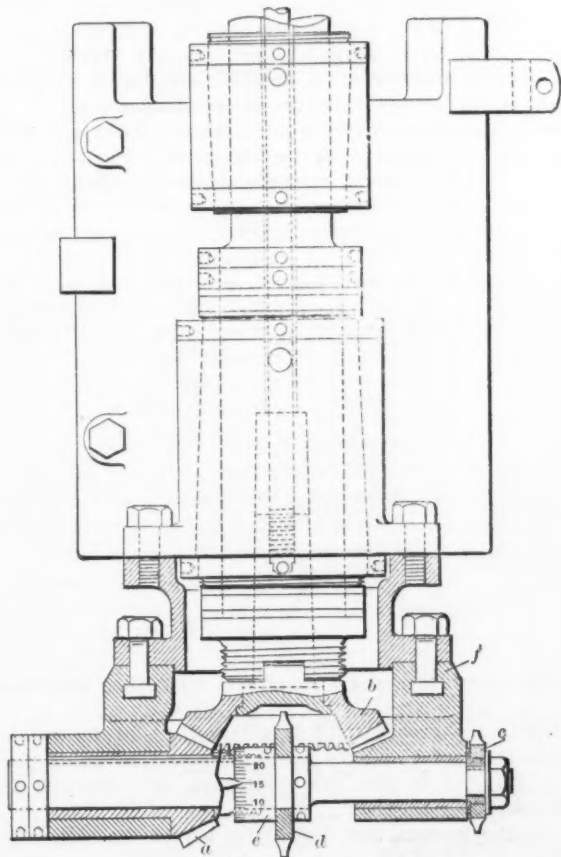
Detail of the Becker-Brainard Horizontal Milling Attachment.
